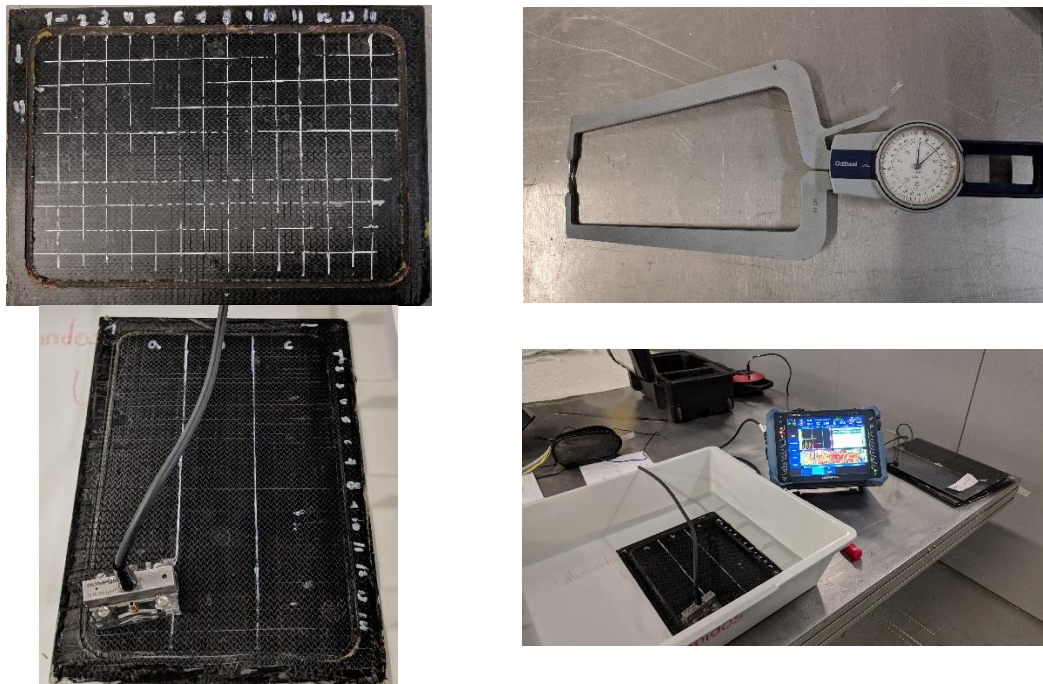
Dimensional analysis and ultrasonic testing of the HP-RTM panels prior samples cutting.
